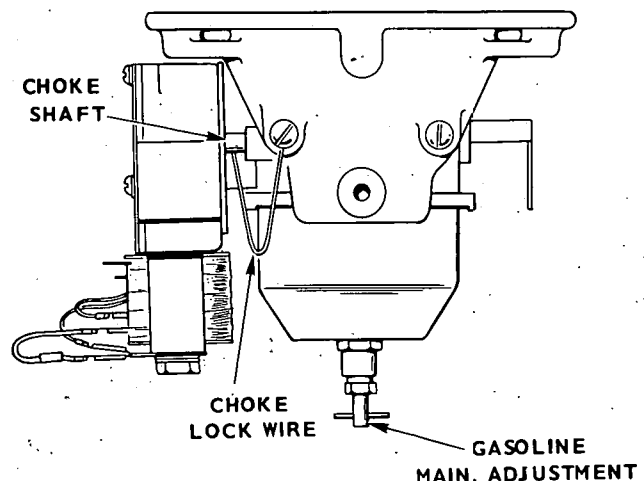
GAS-GASOLINE CARBURETOR ADJUSTMENT
